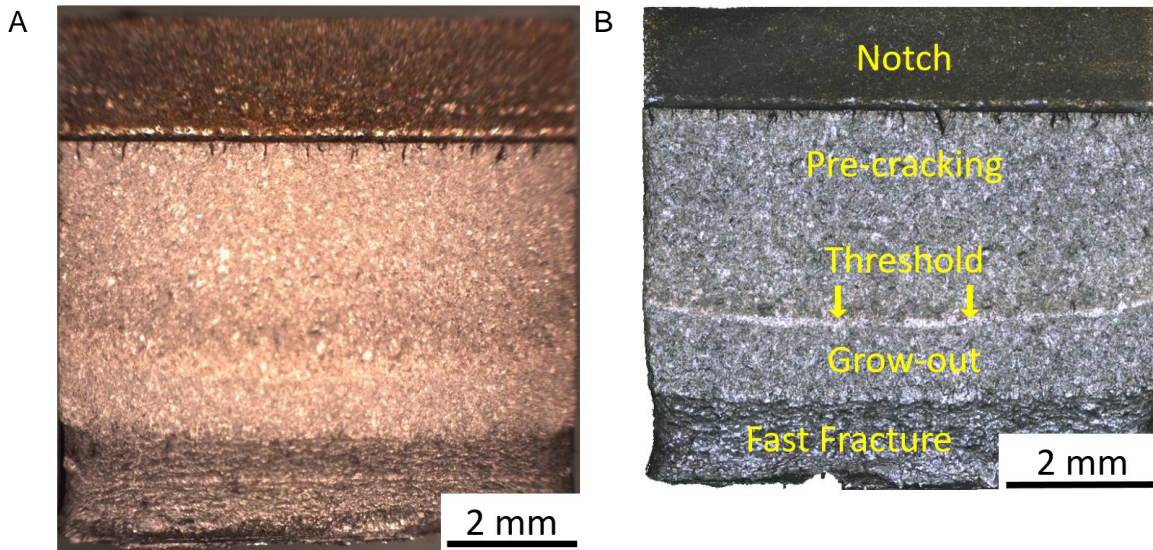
Fracture surfaces of SEN samples after long crack testing to threshold of (A) FV566, (B) FV520B.
